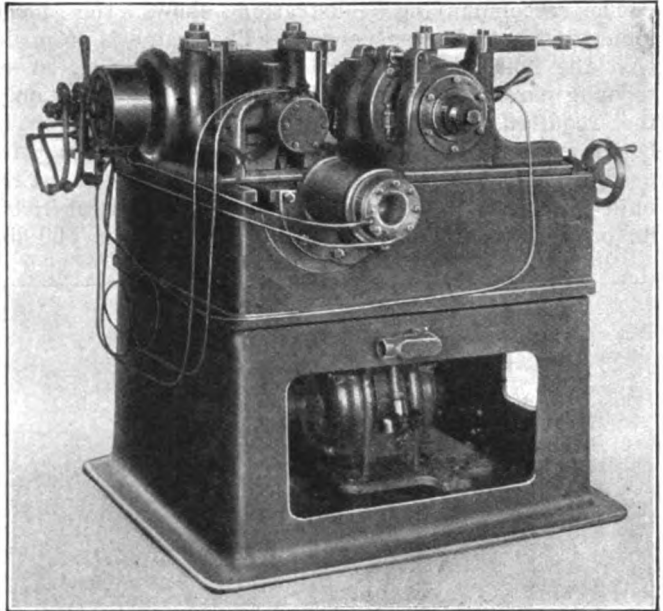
REAR OF DAVENPORT GEAR TESTING MACHINE
